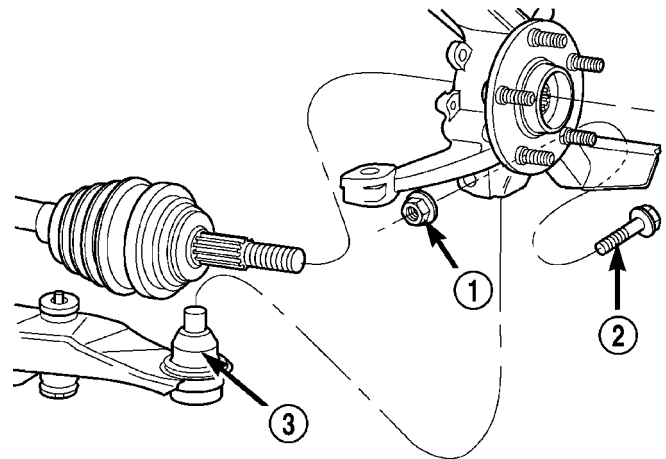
Driveshaft Installation Into Hub And Steering Knuckle
